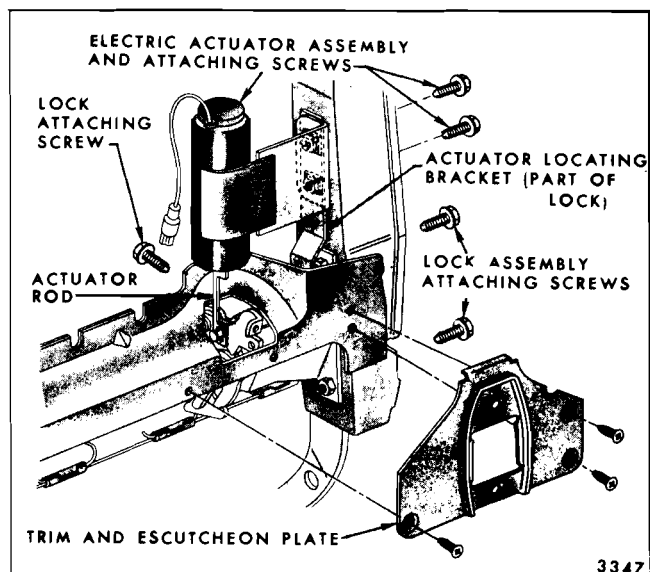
Seat Back Lock and Electric Acuator Assemblies—Cadillac Two-Door Styles with Standard Full Width Seats
